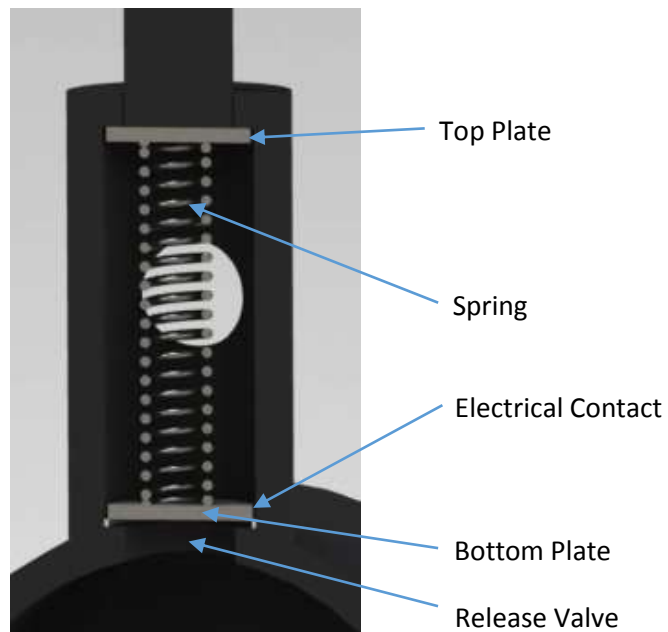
Cutaway CAD model of the pressure controller assembly
